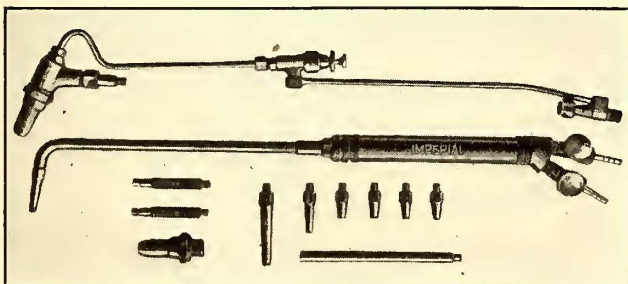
WELDING TORCH WITH CUTTING ATTACHMENT REMOVED
